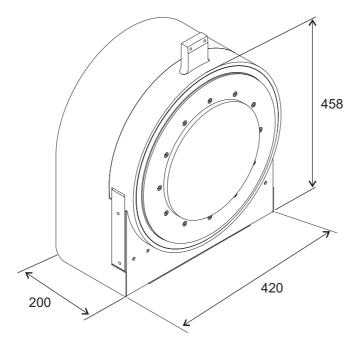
Dimensions of the ARQ 151 6"/8" (in mm)
